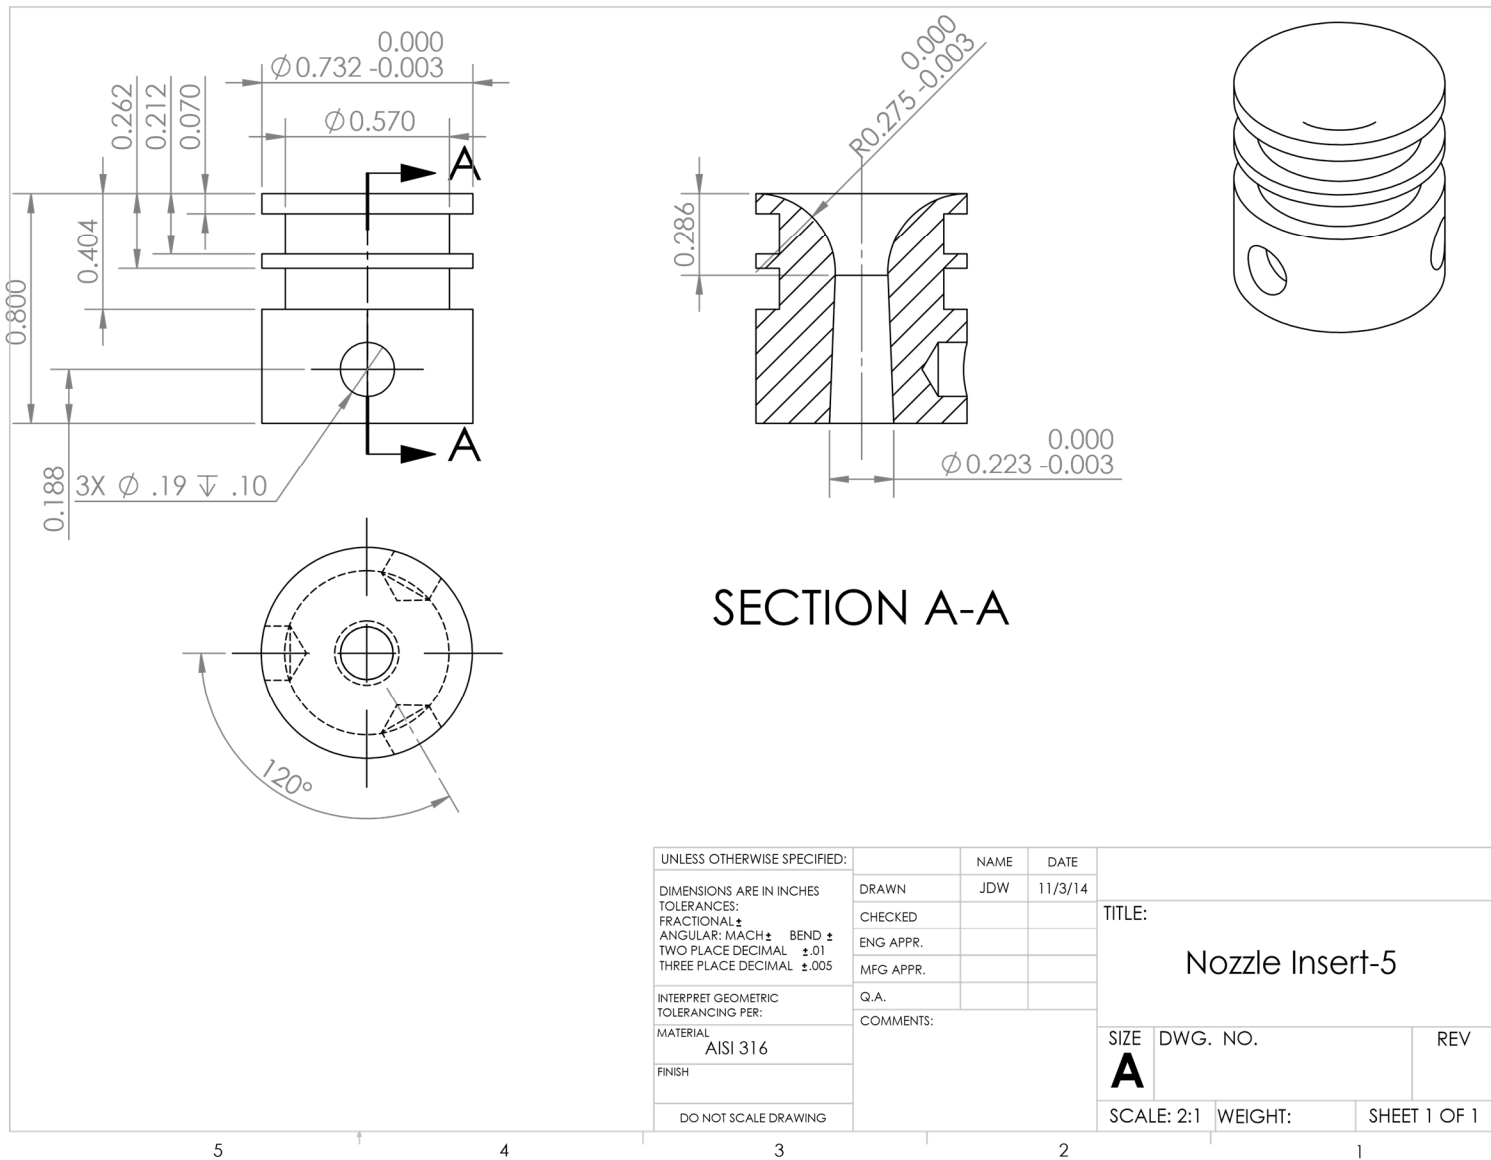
Converging-Diverging Conical Nozzle Machine Drawing
